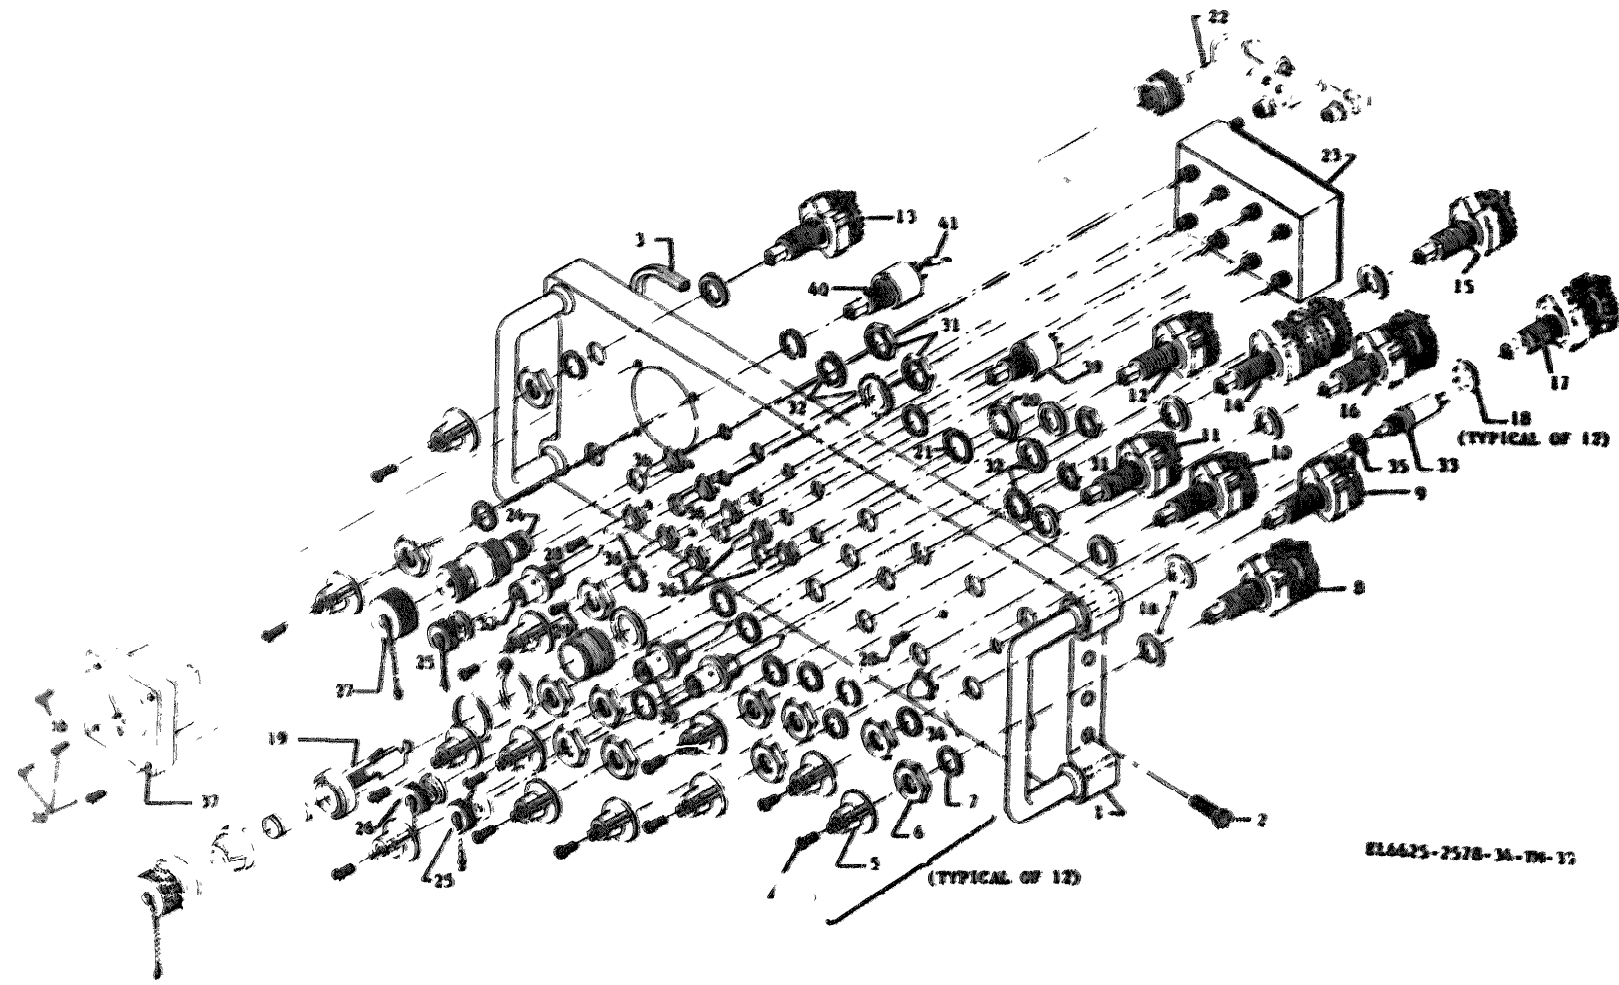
Front panel assembly 1A1A18, exploded view.
